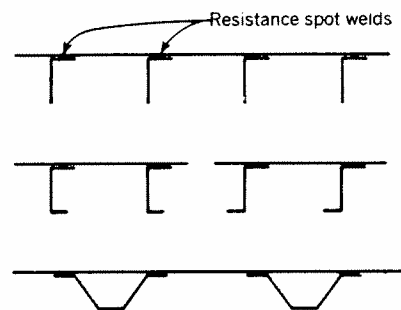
Suggested welding of the ribs to the deck plate by means of resistance welds [44]
